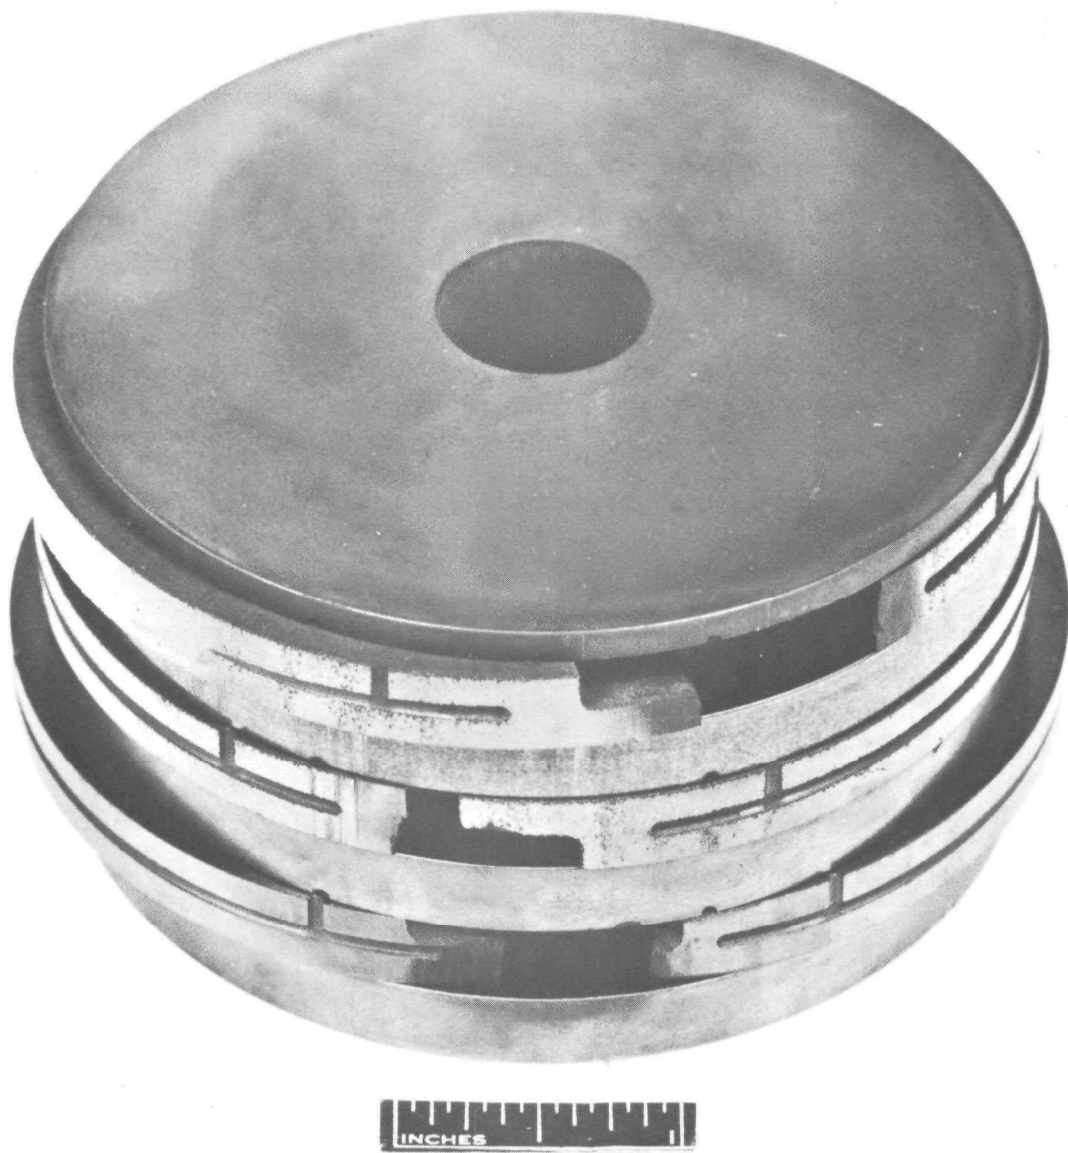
Crosshead Expander Carbon-Graphite Rings (CC-5A)
